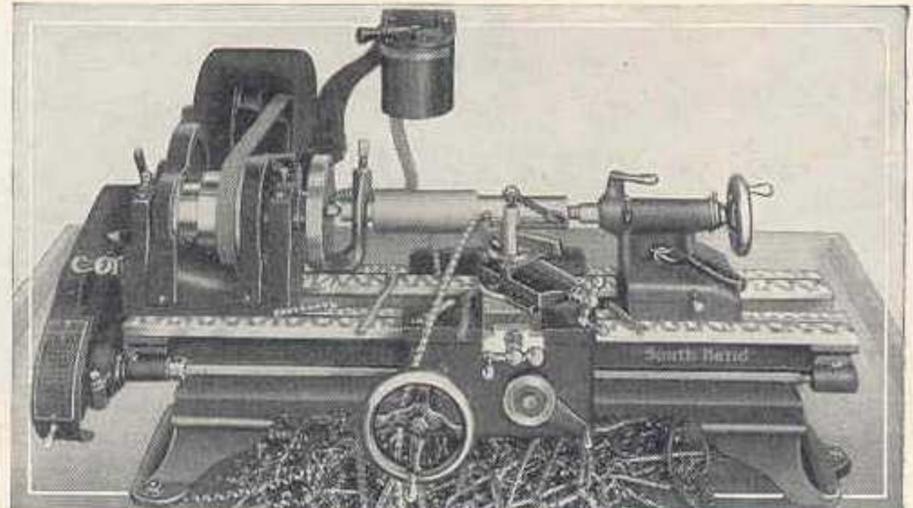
9-Inch Junior Horizontal Motor Driven Bench Lathe.
